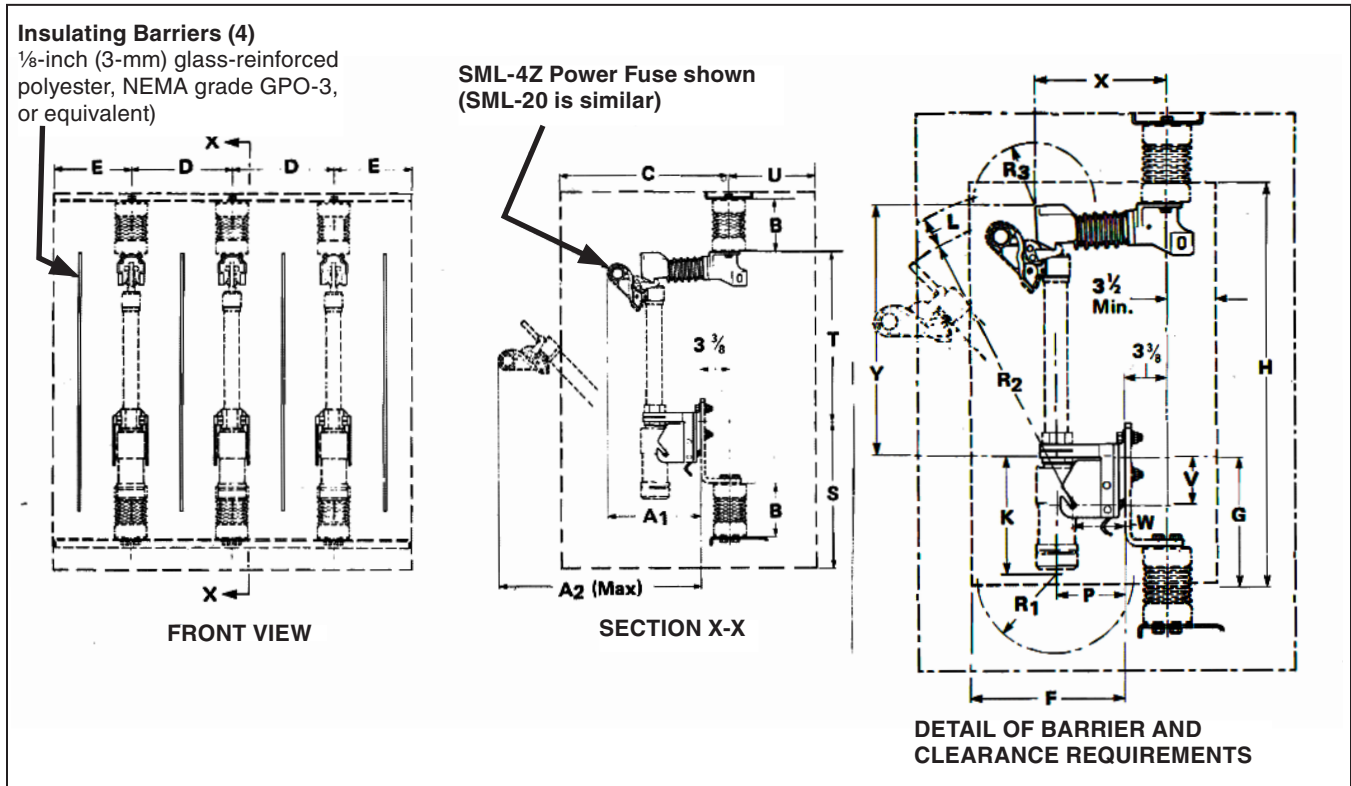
Enclosure and Insulating-barrier dimensions for a mounting configuration using a bottom-supported hinge-and-lower-contact assembly.
